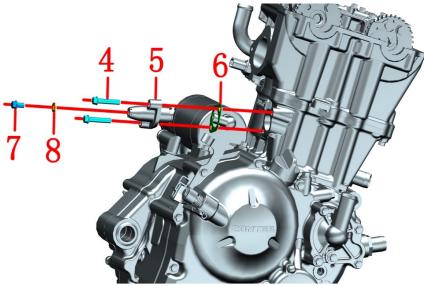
C	YLINDER HEAD	Remove camshaft 1	CHK
